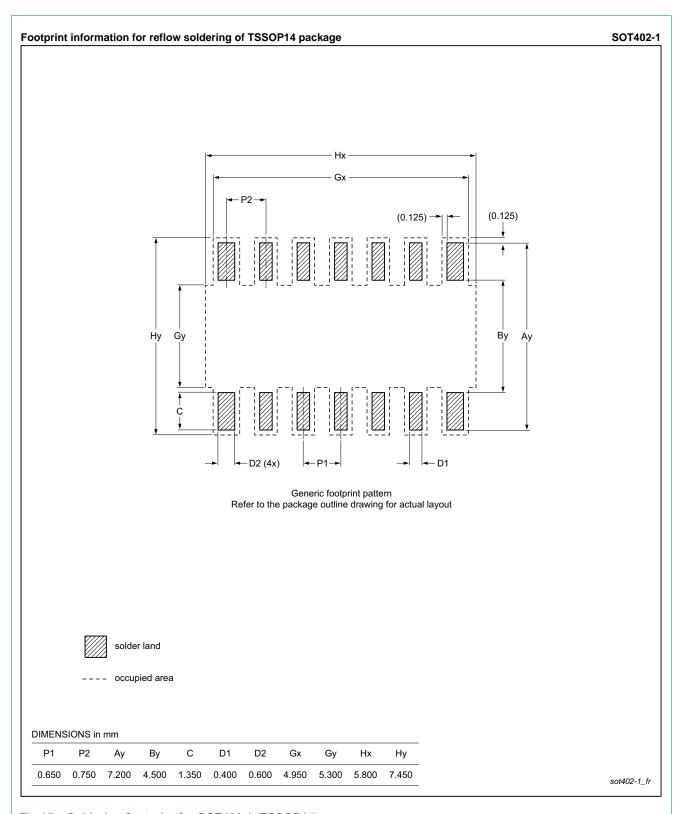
Soldering footprint for SOT402-1 (TSSOP14)
